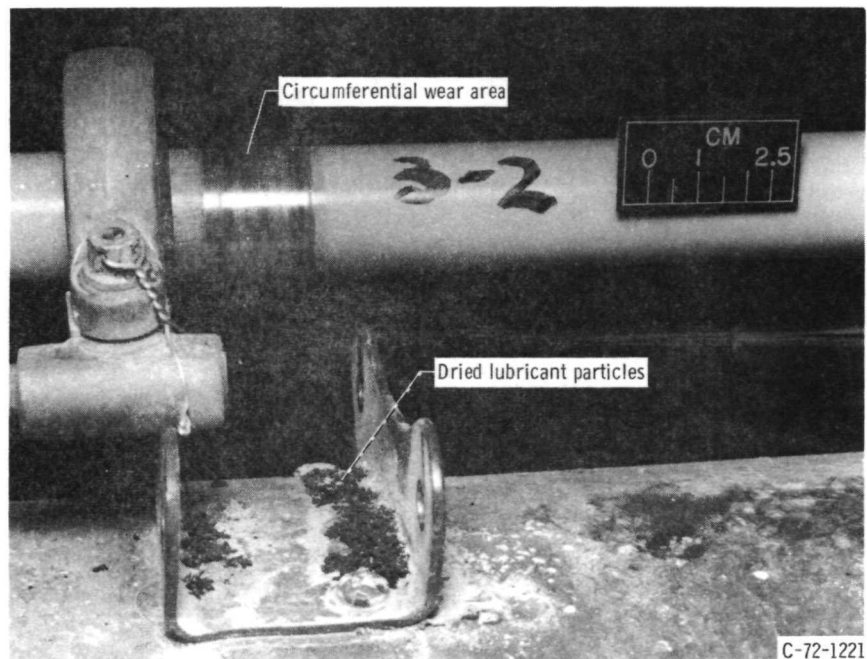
Failed bearing showing wear on shaft and accumulation of dried lubricant particles on hanger bracket.
